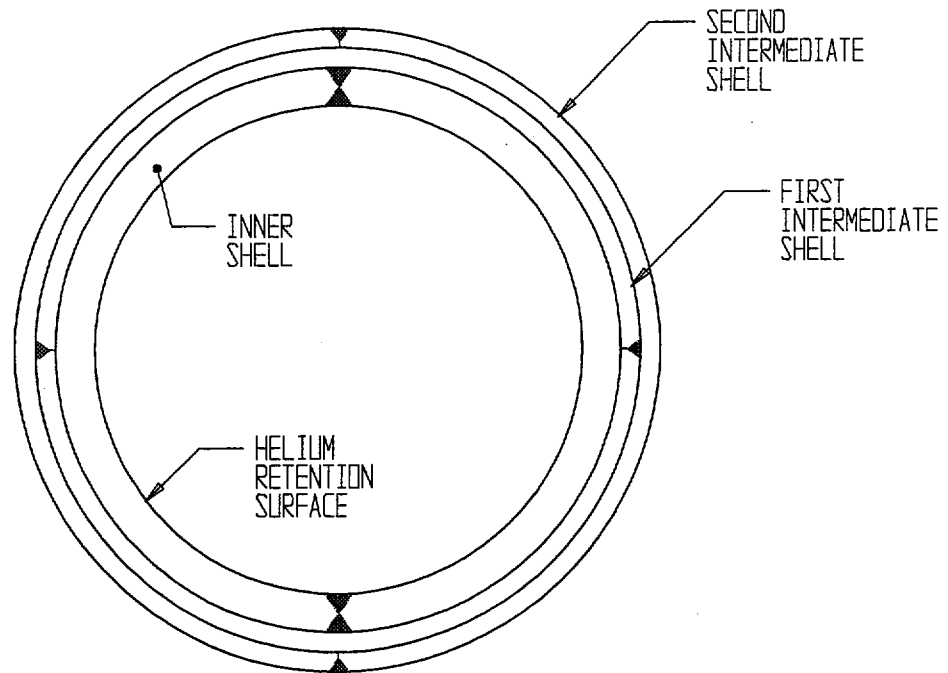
; CROSS SECTION ELEVATION VIEW OF OVERPACK
